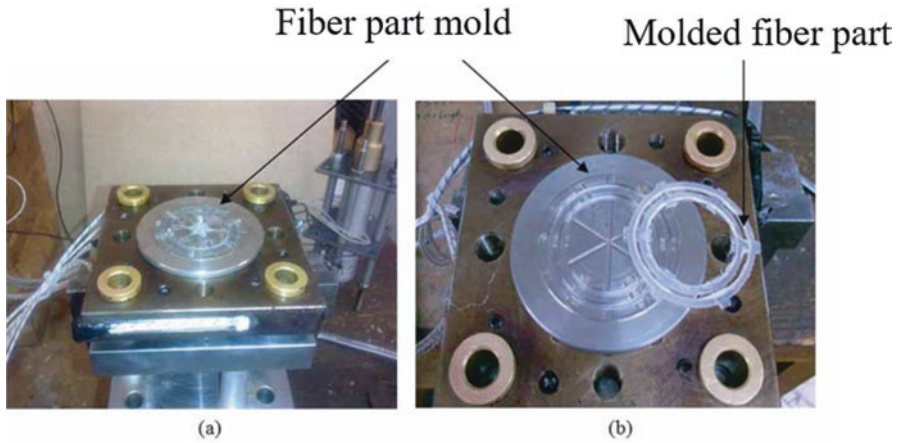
The mold for fabricating the fiber-part (a) the molded fiber-part within the mold (b) the fiber-part after being removed from the mold
